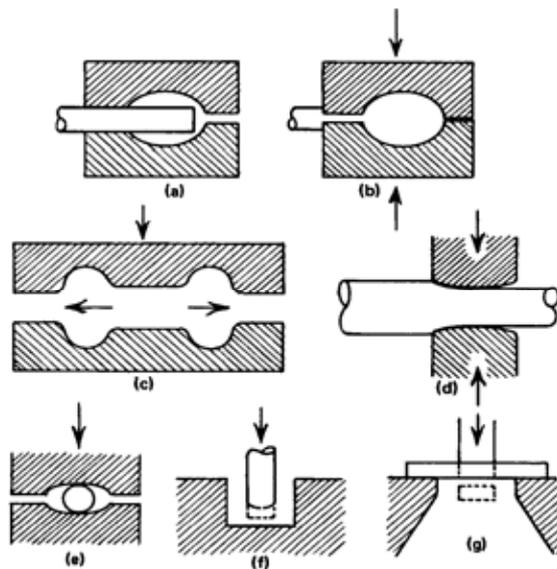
Forging operations; (a, b) edging; (c) fullering; (d) drawing, (e) swaging (f) back extruding; (g) punching.
